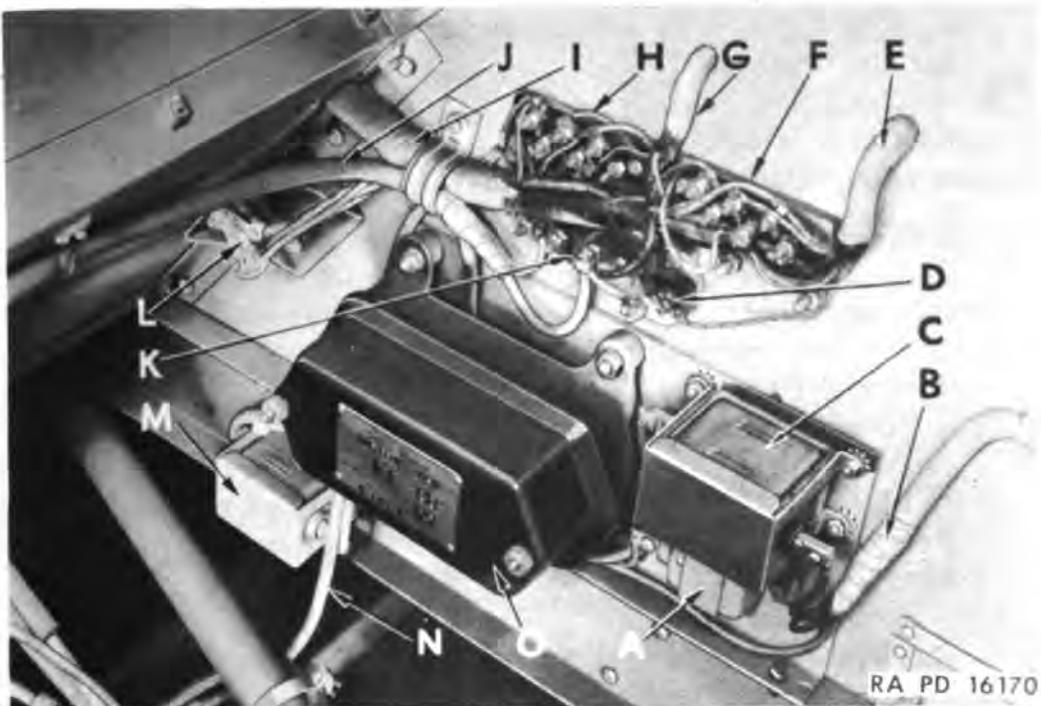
Regulator, Filters, Junction Blocks and Wiring Harness Installation
